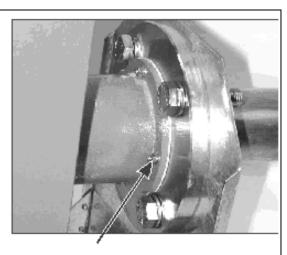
Probe chapter(connection side), LAMBDA TRANSMITTER E connection to probe body
